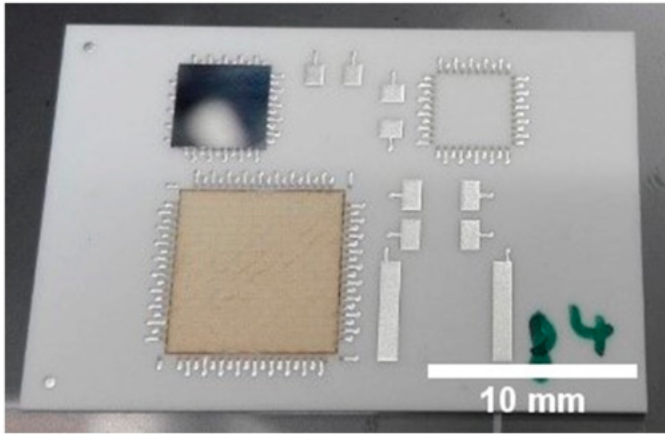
The printed sinter paste depots on the contact pads of a test ceramic board (appearing dark gray on the lighter AgPt-pads on the top right), a placed prepreg-material piece (bottom), and a placed chip (top left).
